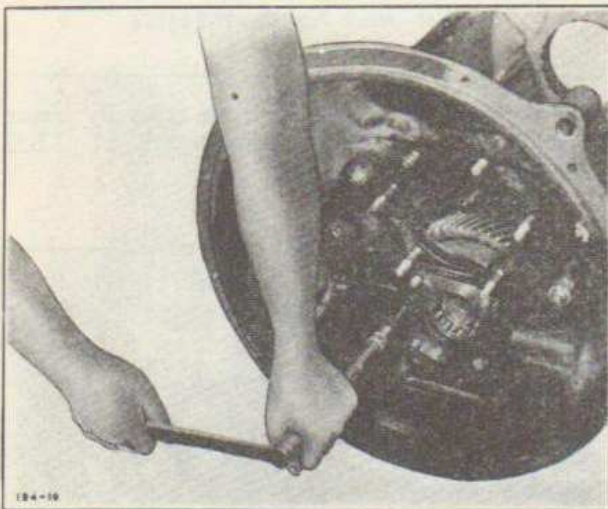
Pulling Countershaft Front Retainer and Bearing
